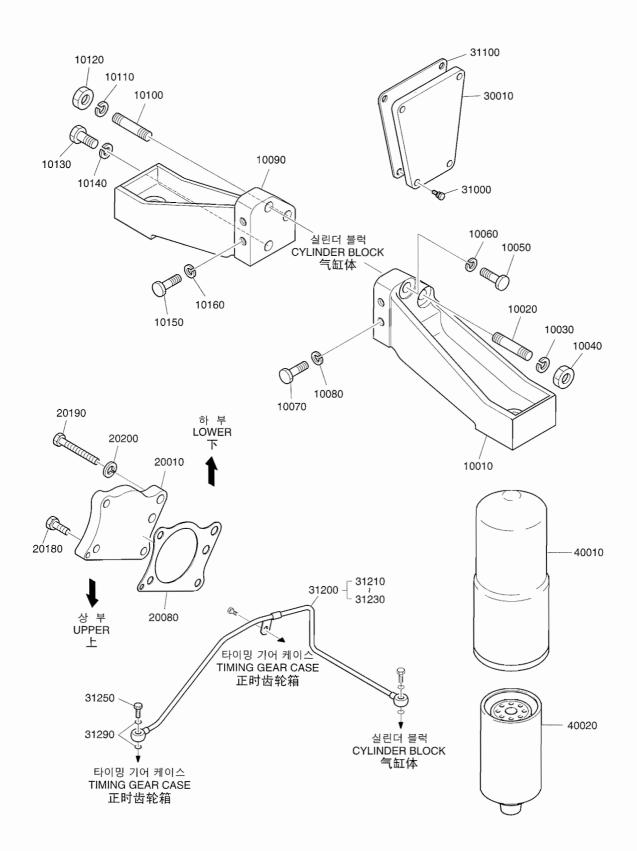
ENGINE MOUNTING & ETC | 엔진 마운팅 및 기타 | 发动机固定架及其它
